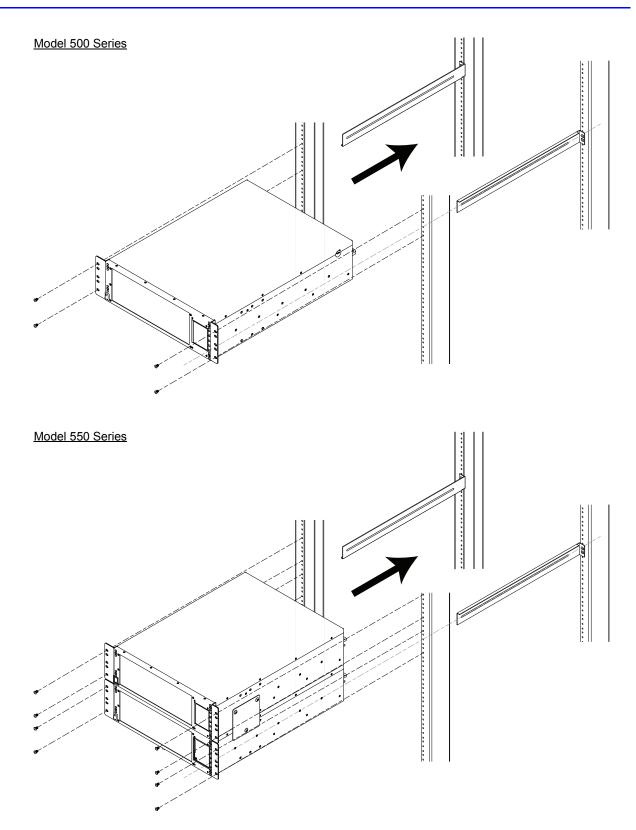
Securing the Chassis Mounting Ears to the Front of the Rack
